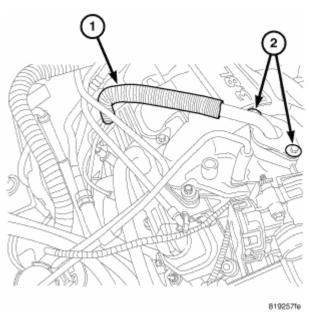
EGR Tube Flange Courtesy of CHRYSLER LLC
